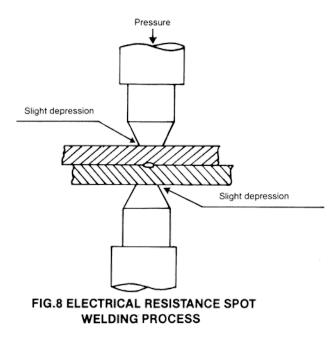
ELECTICAL RESISTANCE SPOT WELDING PROCESS
